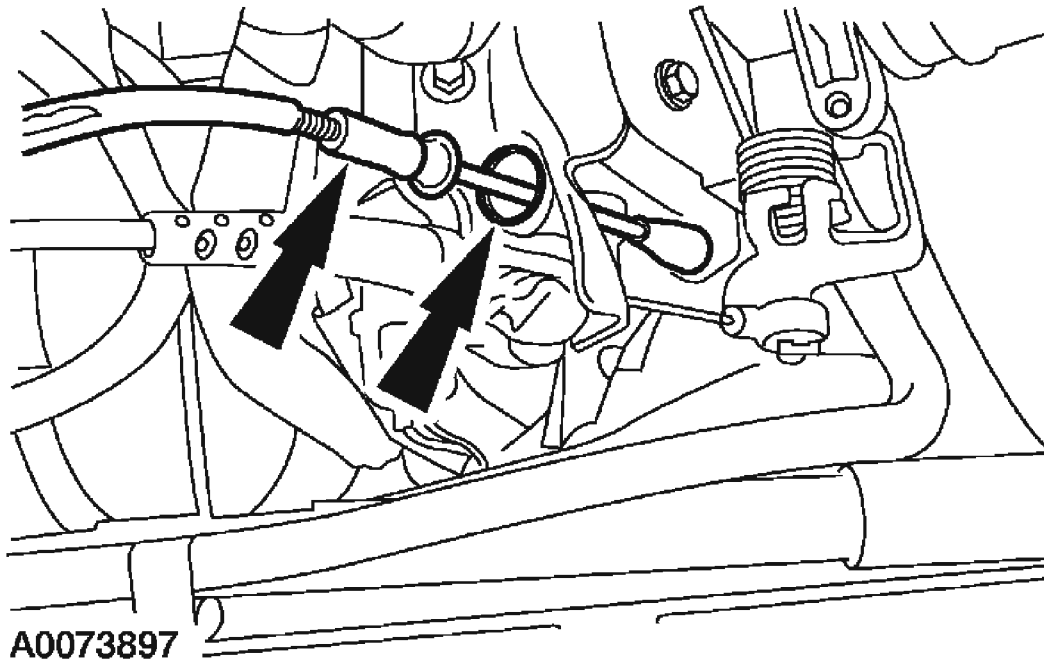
Removing Speed Control Cable From Throttle Body Bracket
